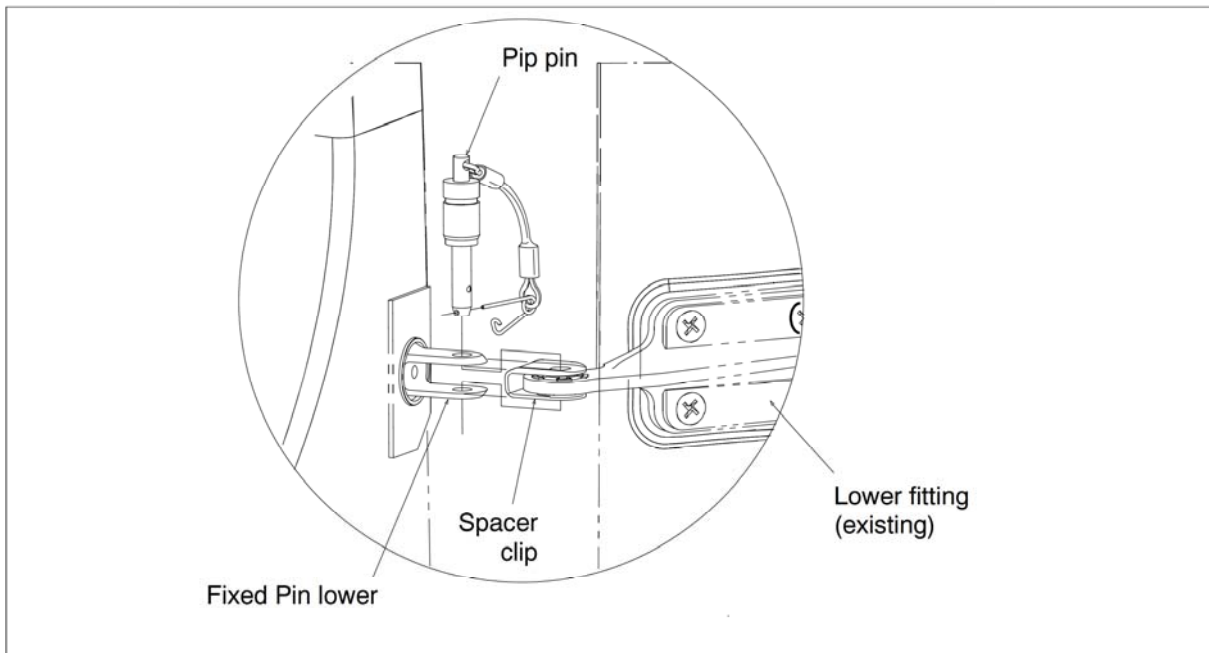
Replacement detail showing spacer clip alignment into pin lower
